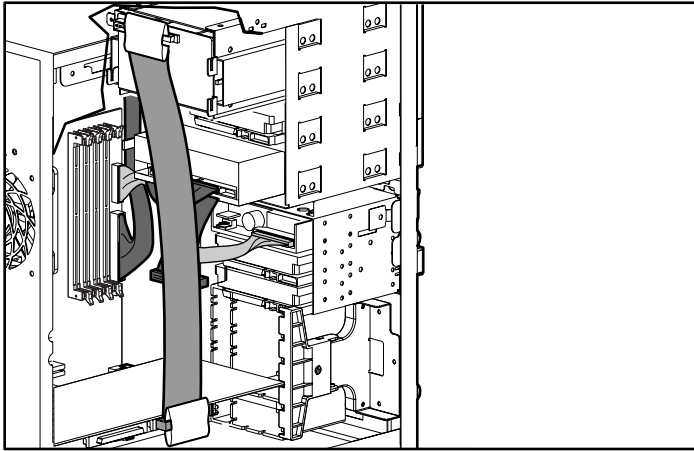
Cabling a two-bay hot-plug SCSI drive cage
